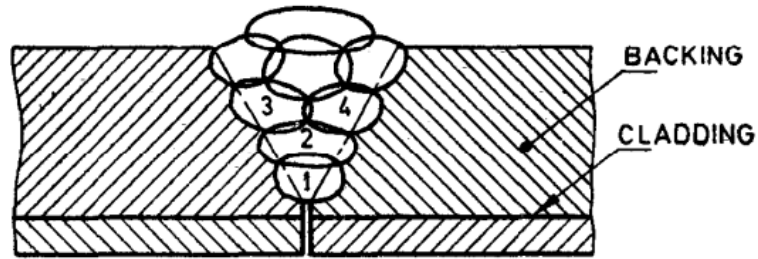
EDGE ALIGNMENT OF CLAD PLATE FOR WELDING
